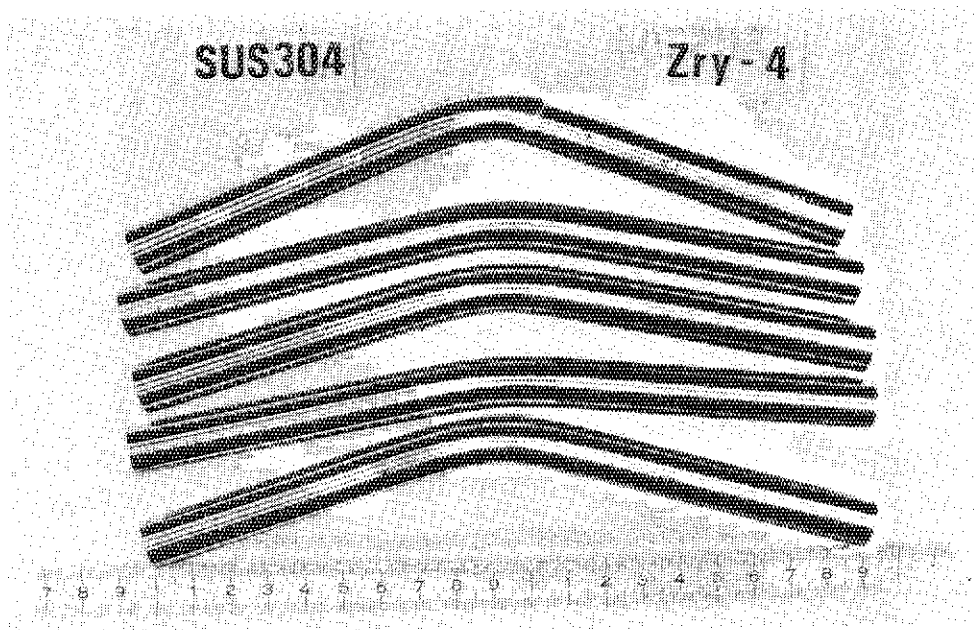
Specimen of the 10°-tapered eutectic joint for bend test (F1-F5)
